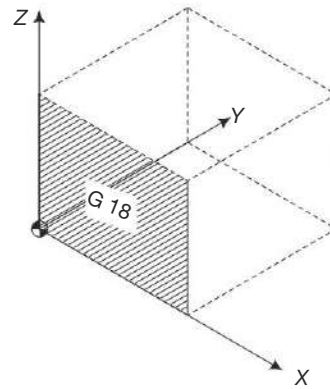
XZ plane selection for horizontal-axis milling machines
